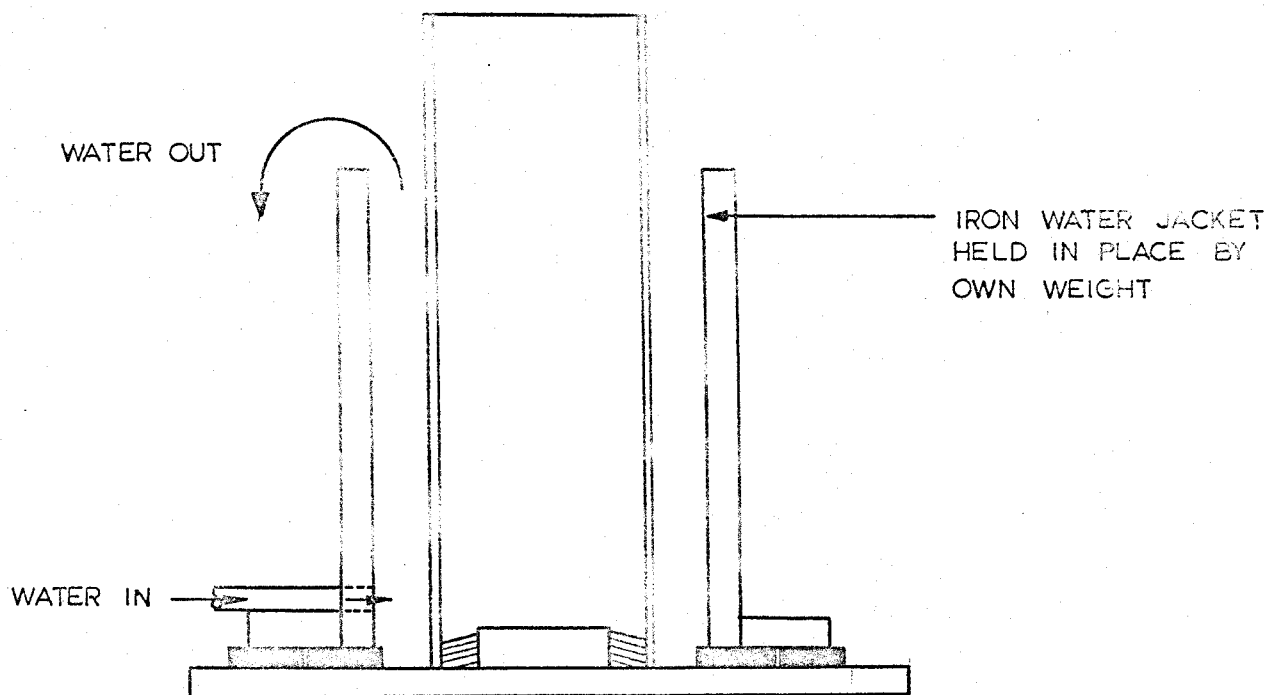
A longitudinal section through the electrically conducting mould wall system.
